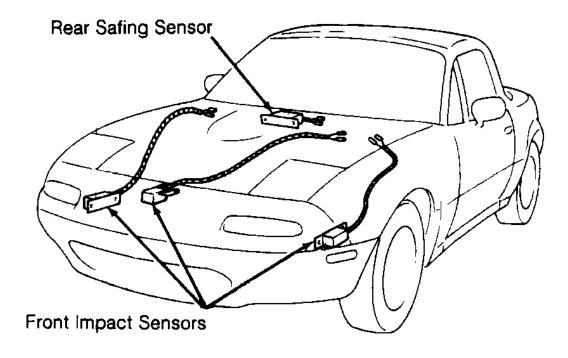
Locating Crash Sensors (Miata) Courtesy of MAZDA MOTORS CORP.
